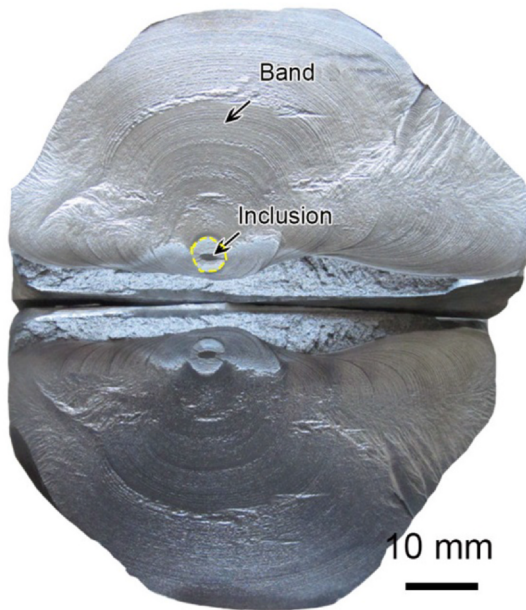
Fracture surfaces of shattered rims [4].
